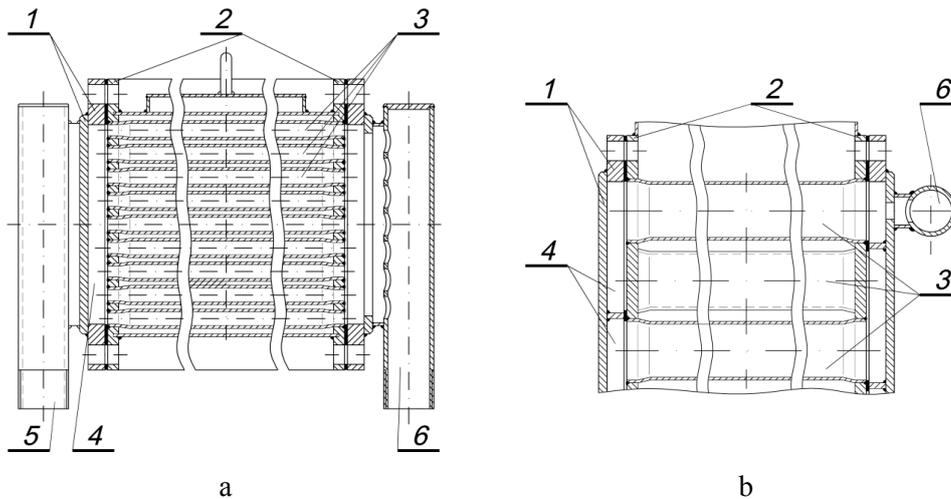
Pipe bundle of the contact-recuperative part: a – horizontal section; b – vertical section; 1 – tube cover; 2 – tube sheet; 3 – flat oval tube; 4 – bypass water chamber; 5 – outlet pipe for heated water; 6 – cold water inlet
